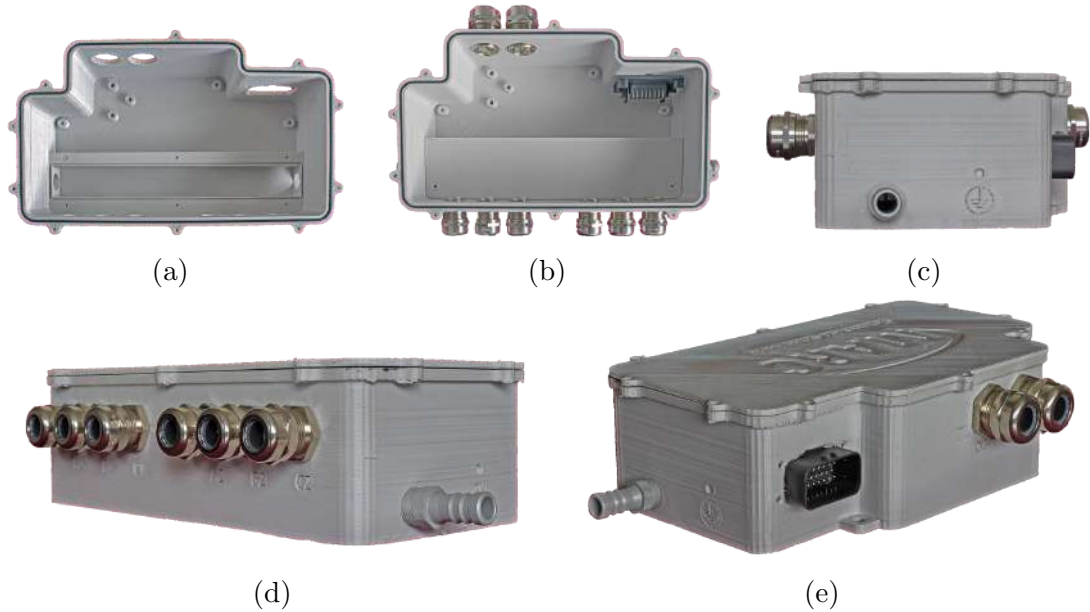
3D printed inverter housing. (a) Un-assembled interior. (b) Assembled interior. (c) Side view. (d) Back isometric view. (e) Front isometric view.
